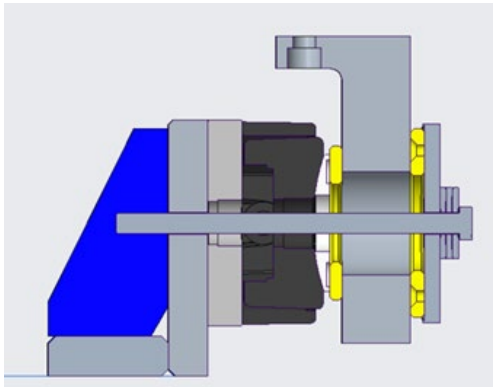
Wedge jack adjuster equipped with Belleville spring washers to pre-load the system and minimize alignment backlash
